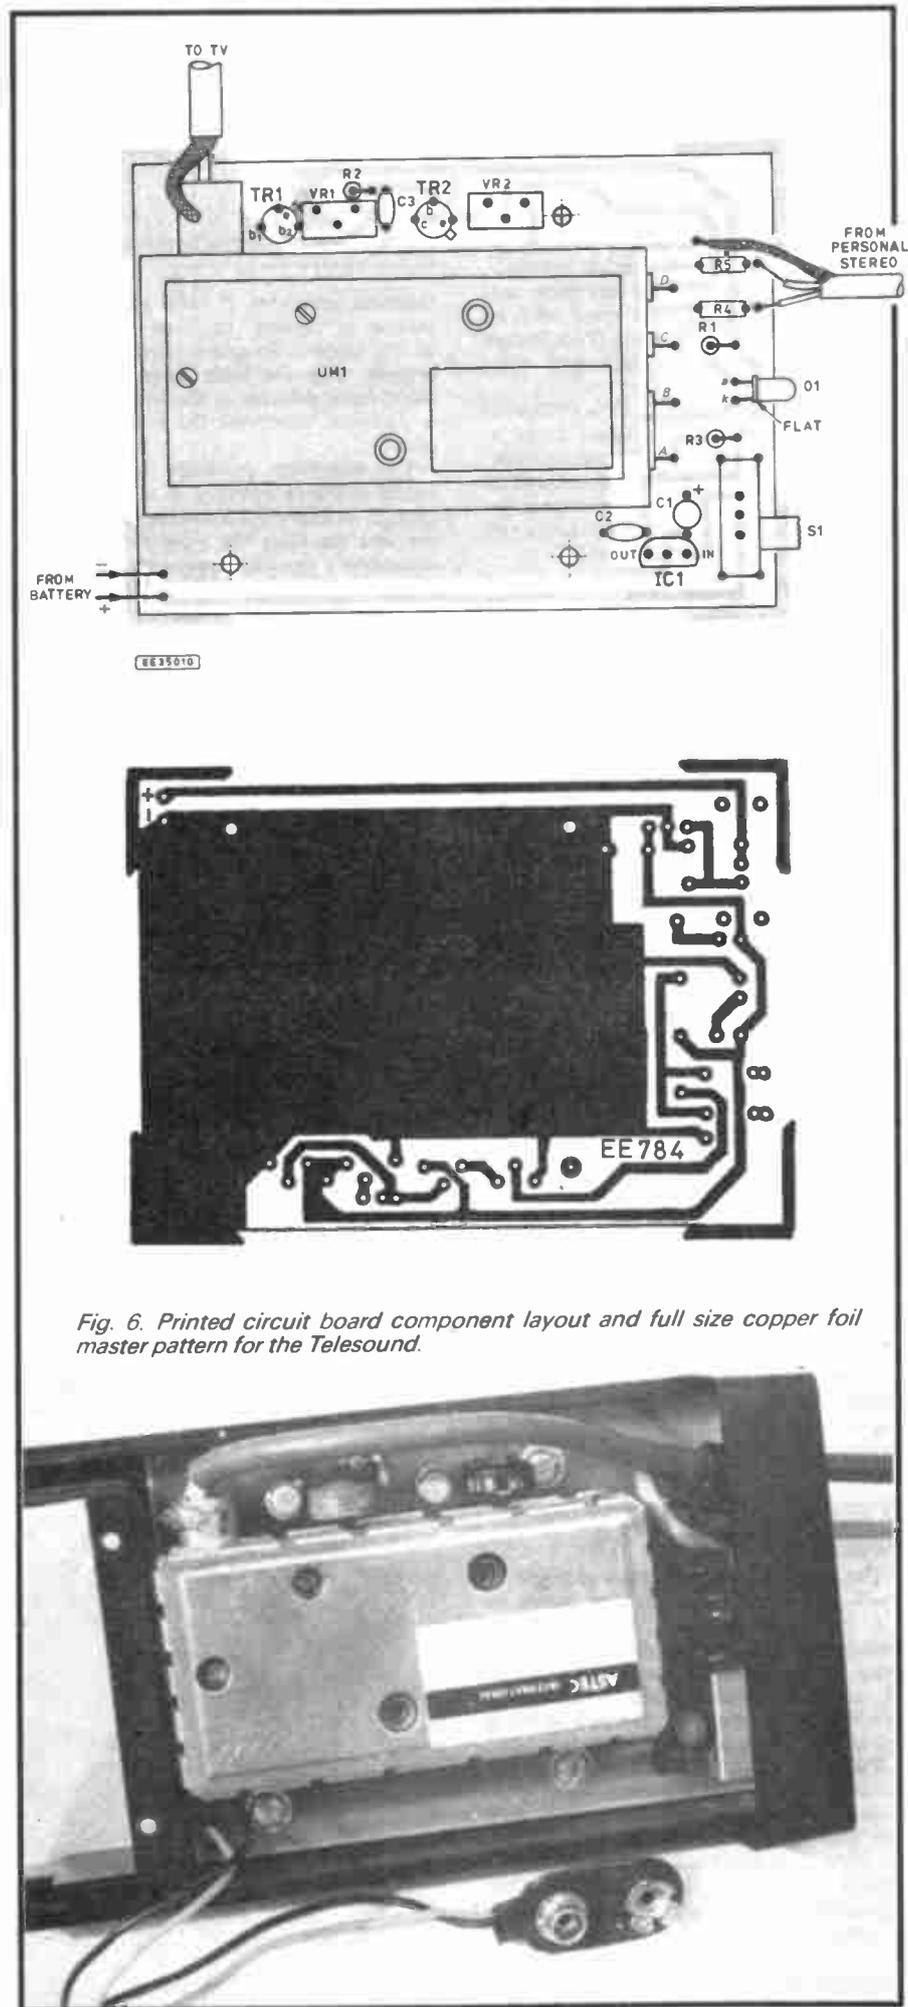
Printed circuit board component layout and full size copper foil master pattern for the Telesound.
